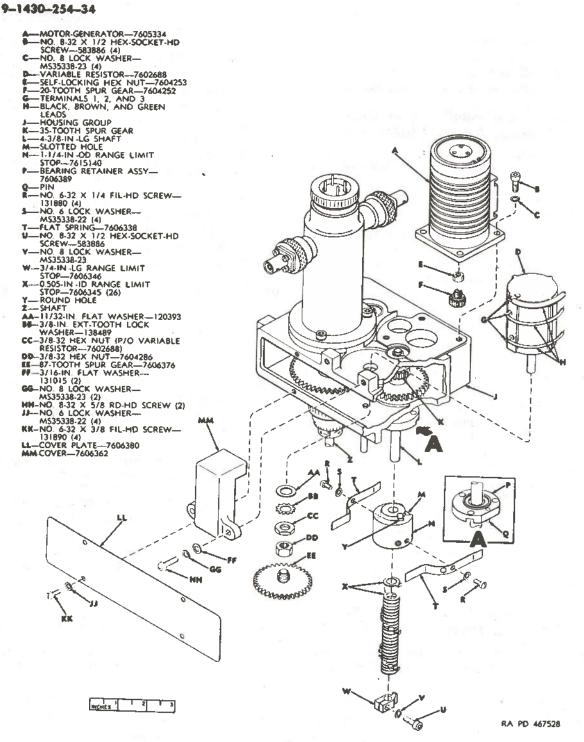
Receiver tuner assembly 7621790—partially exploded view No. 2.
